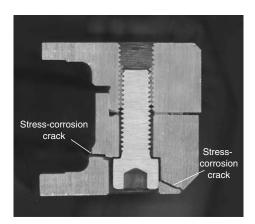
Cut-away view of the ring gear and bolt showing stress-corrosion cracking. Source: Ref 1
